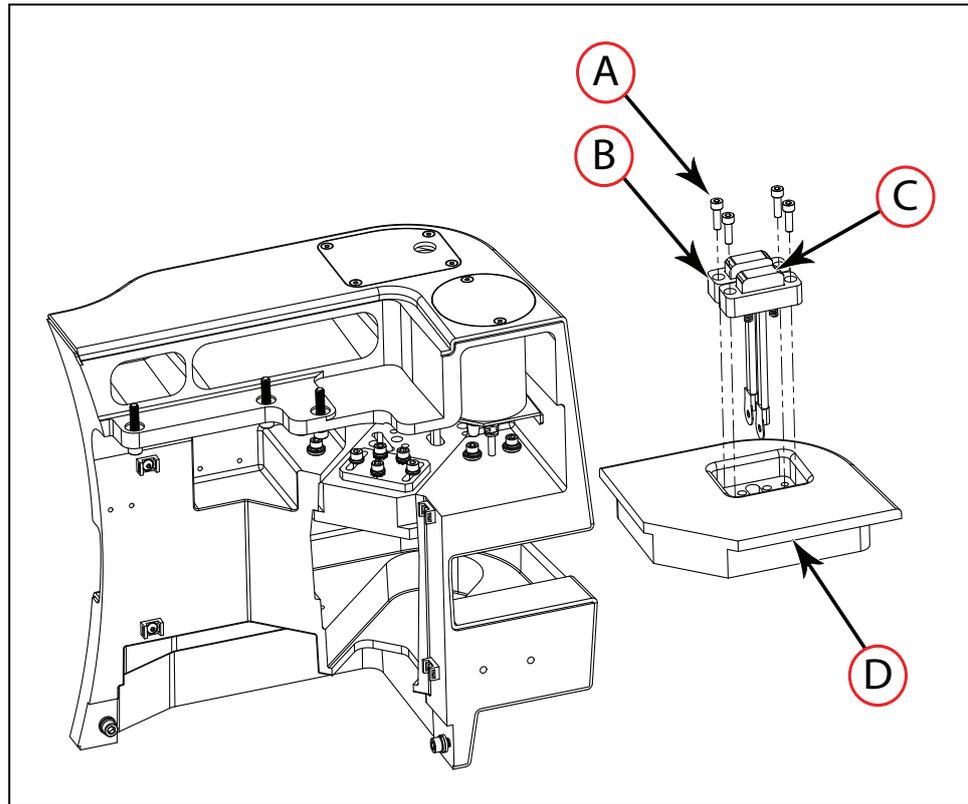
(A) M5 Screw, (B) Contact Holders, (C) Charging Contact, and (D) Base Plate
